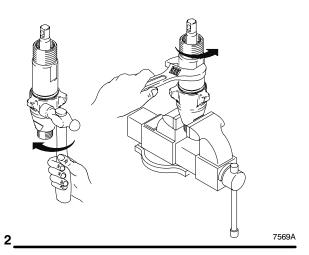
Disassemble intake valve. Clean and inspect. O-ring (227) may require a pick for removal.
